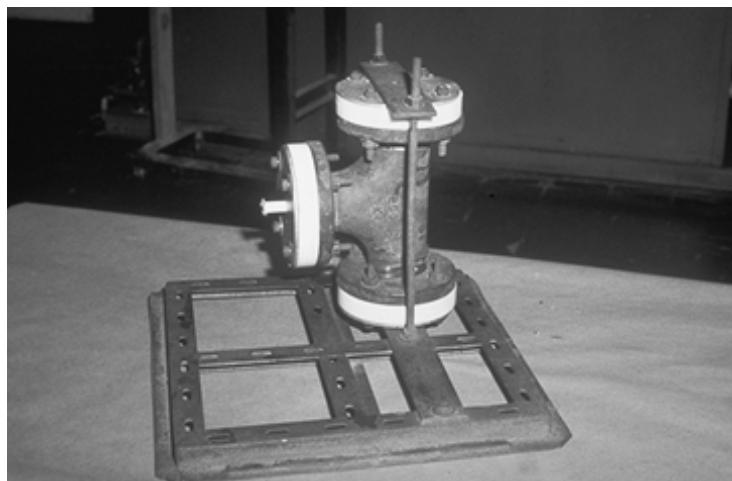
Roto-Lining—Flange Fitting onto Rotating Rack
